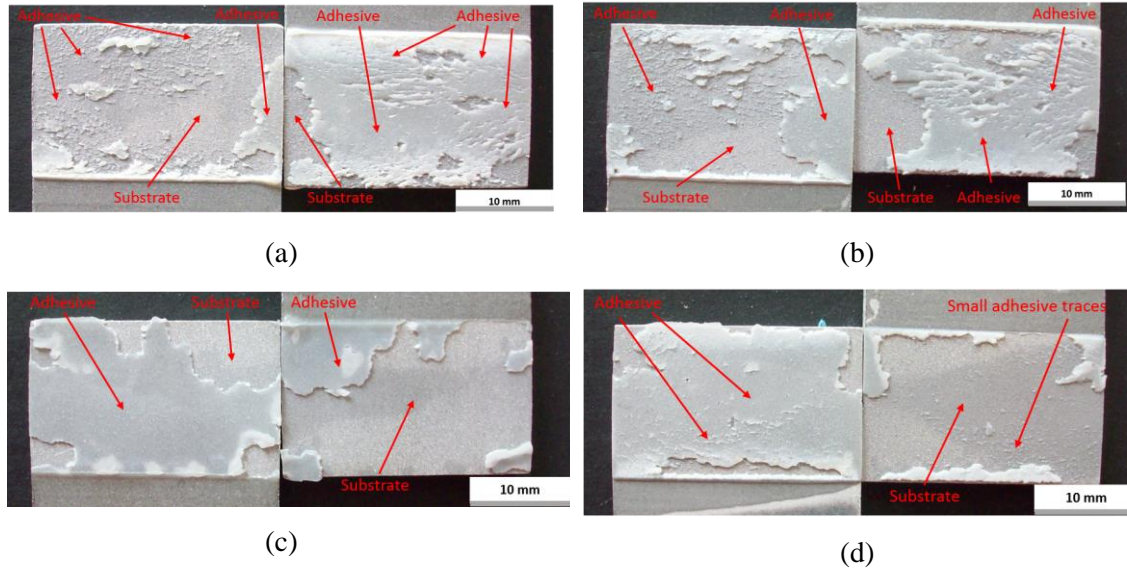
Photographs showing details of fracture surface of aluminium SLJs pre-treated with grit blasting and subjected to different ageing methods: (a) unaged; (b) method (A); (c) method (B); (d) method (C)
